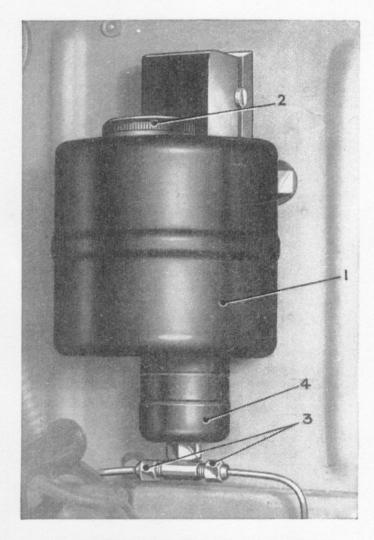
CHASSIS OIL PUMP AND RESERVOIR.
